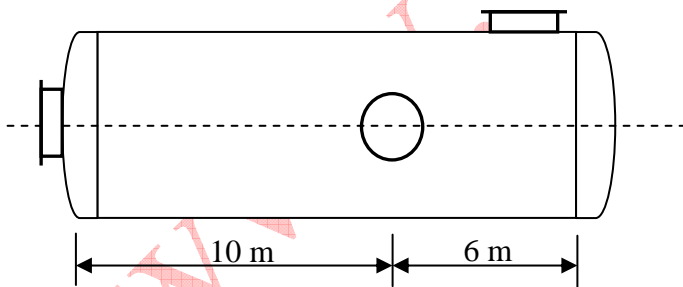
Horizontal vessel without internal side view (all manway 24”)
